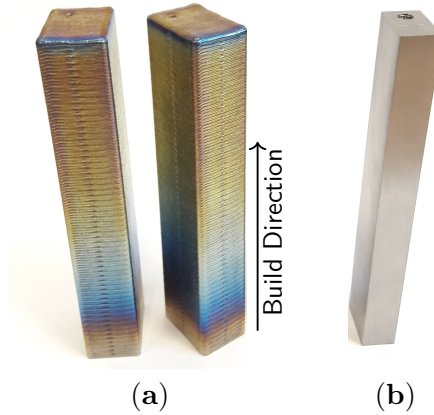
Additive manufactured Ti-6Al-4V specimen produced by laser based DED in as-built condition (a) before milling and (b) after milling
